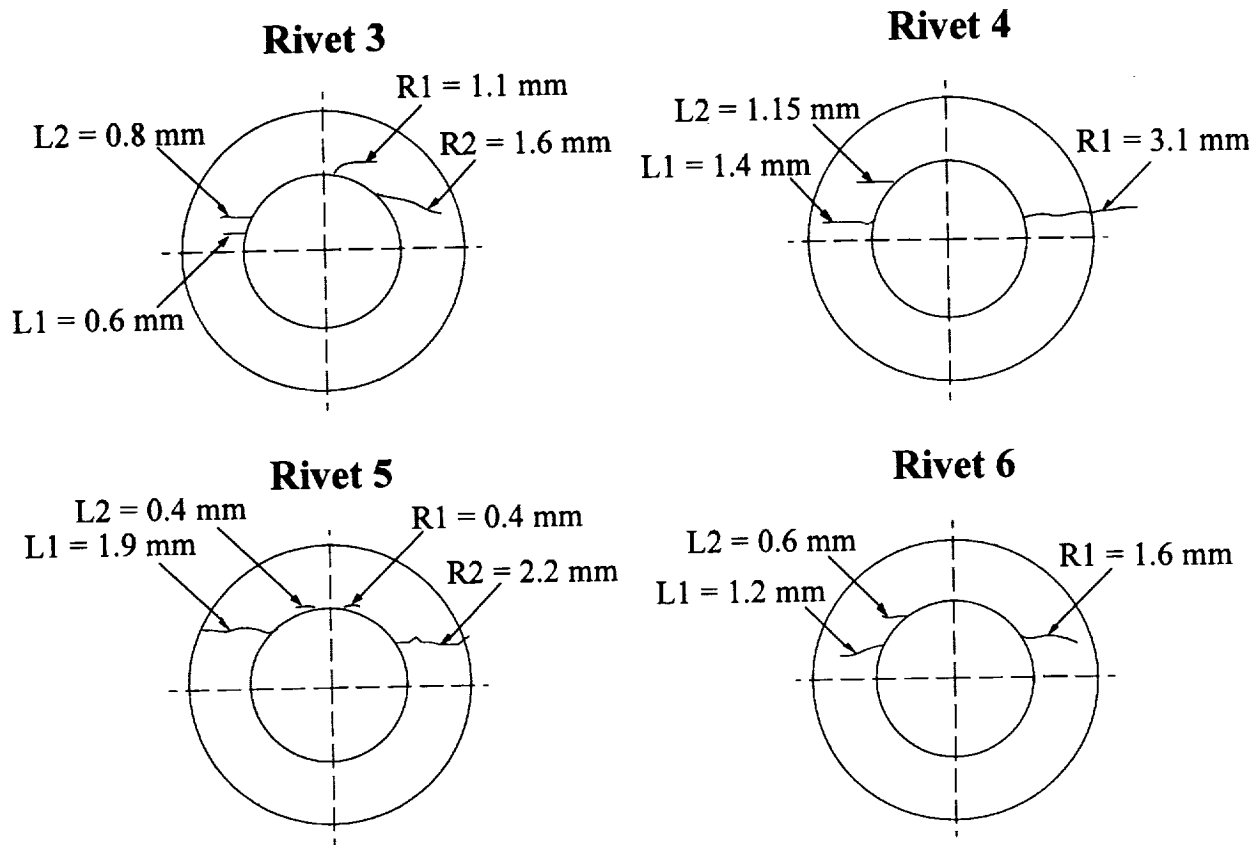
Location and size of fatigue cracks in each of the rivet hole countersinks.
